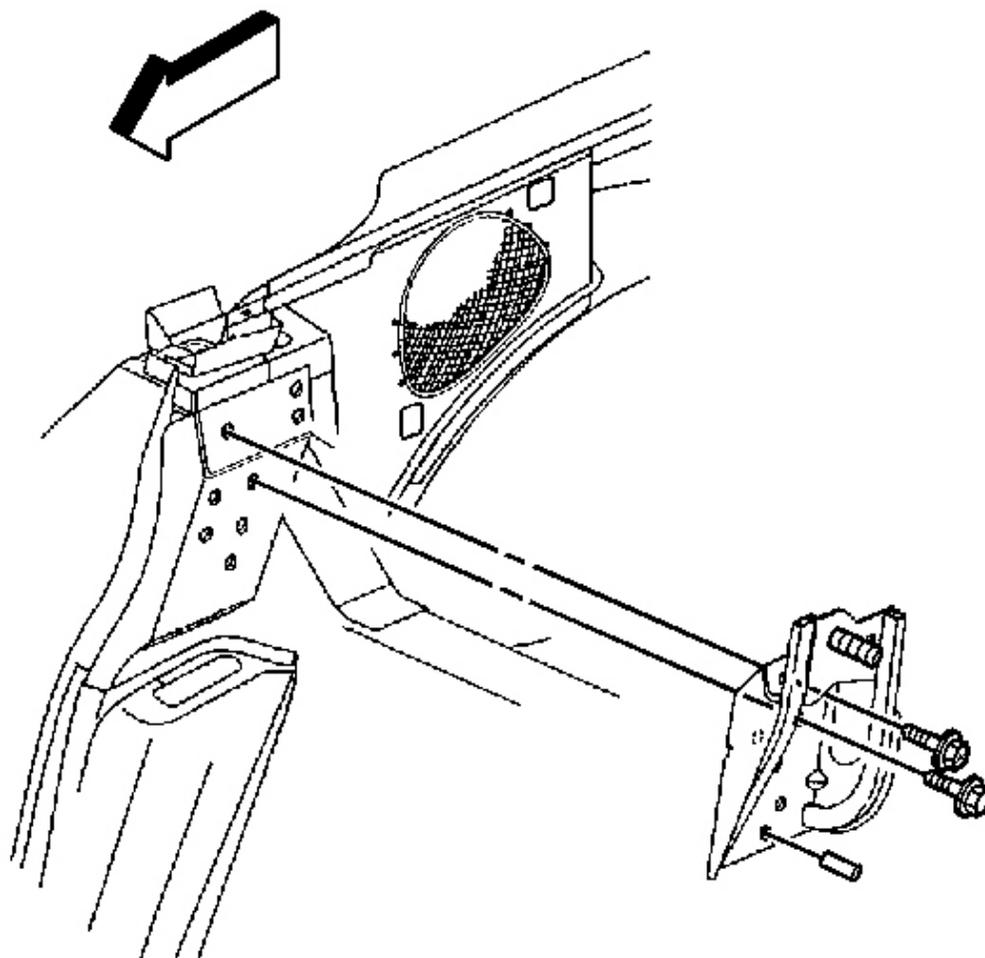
Shoulder Harness Guide Bracket & Bolts
